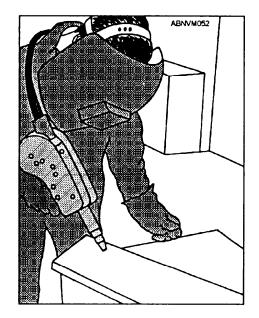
Positioning the GMA gun prior to welding.
